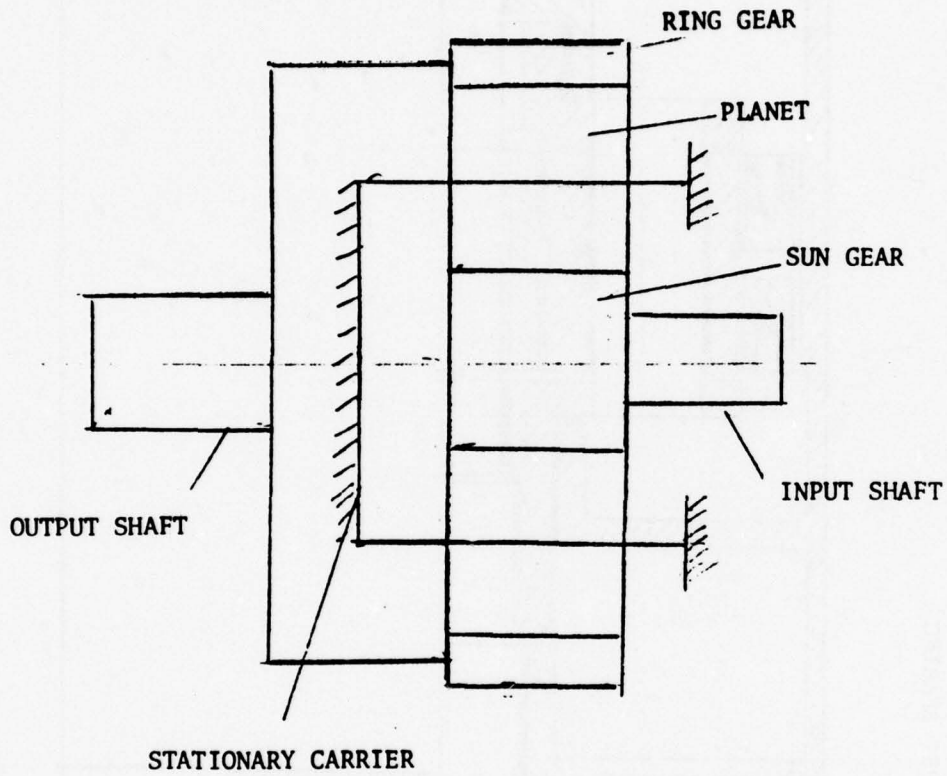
Schematic of Planetary-Star Reduction Gearbox
